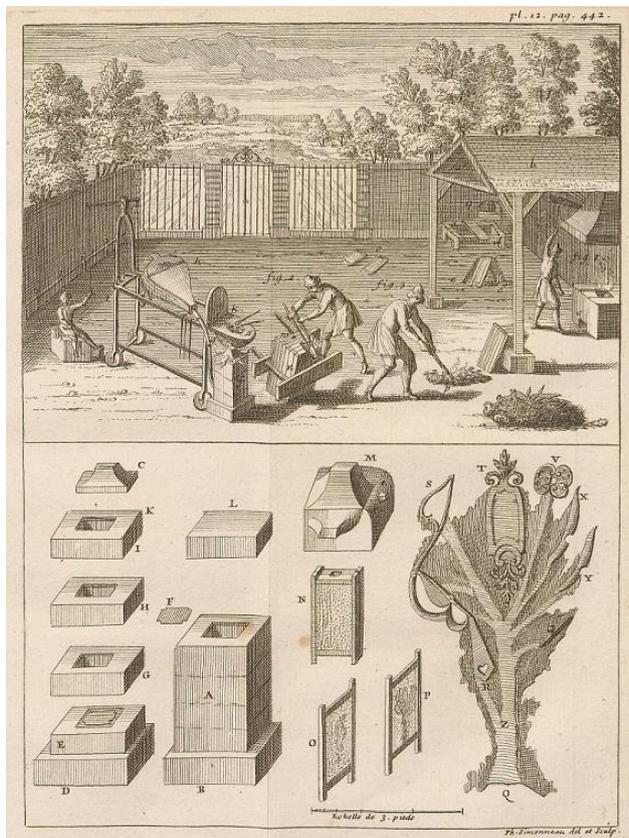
René-Antoine Ferchault de Réaumur, Paris, 1722. Engraving illustrating iron casting in simple bi-valve sand moulds. The moulding sand is held in flasks clamped in a press. Plate 12 from Réaumur, René-Antoine Ferchault de, *L' Art de convertir le fer forgé en acier et l'art d'adoucir le fer fondu, ou de faire des ouvrages de fer fondu aussi finis que de fer forge*, 1722, 442.
